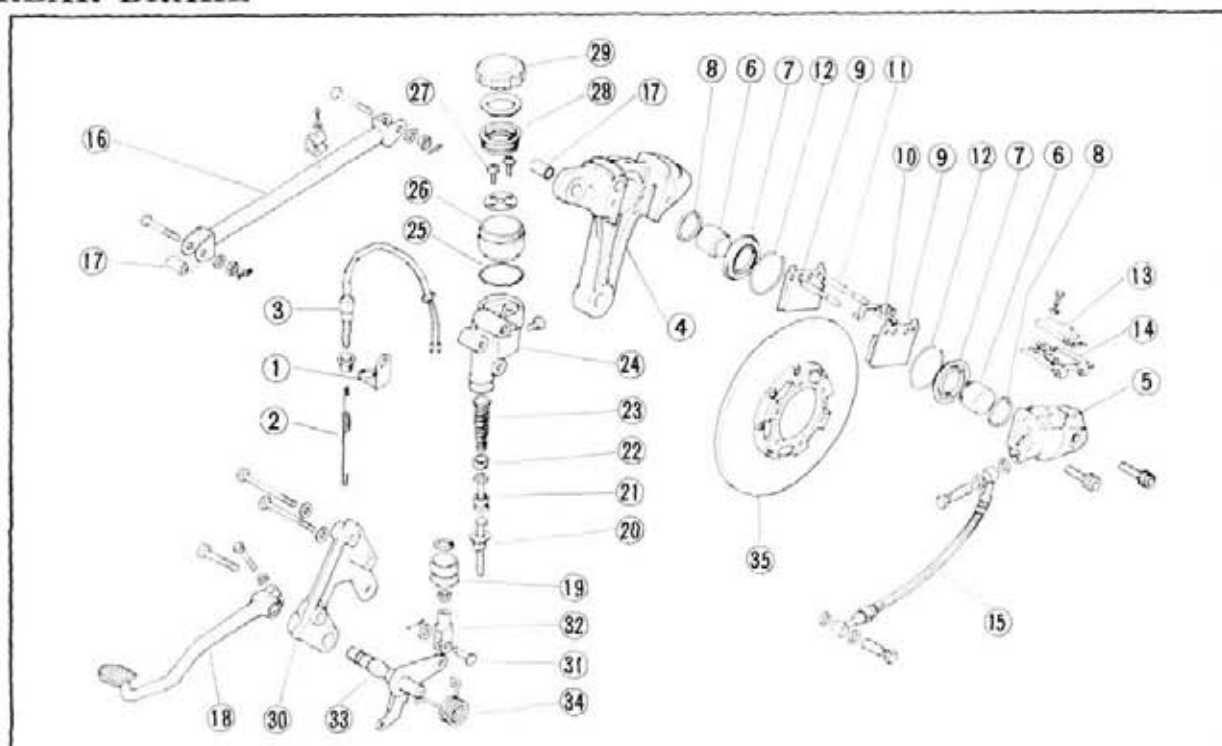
① Stop switch bracket ⑩ Spring pad set ⑲ Master cylinder, boot ⑳ Diaphragm
